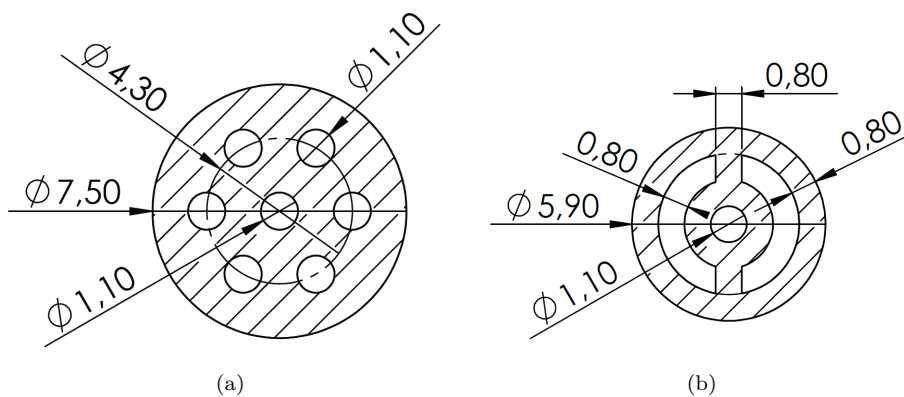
(a) Distal geometry dimensions of Prototype 1 and (b) Prototype 2. (Dimensions are given in mm).
